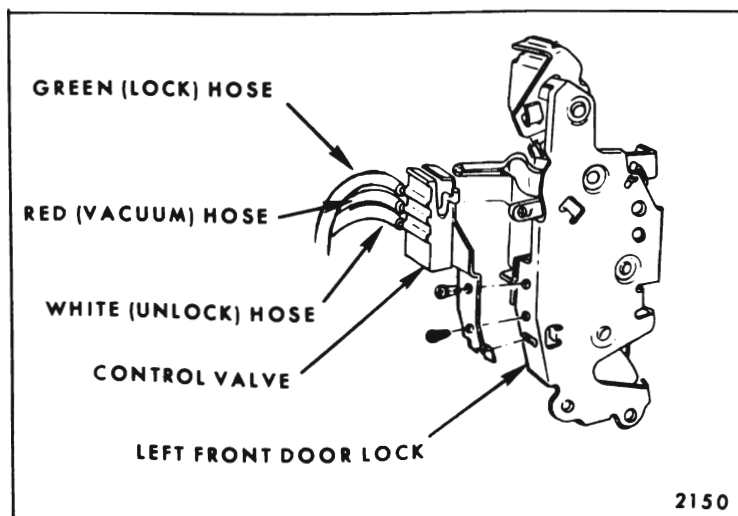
Vacuum Door Lock Control Valve - Pontiac Style
